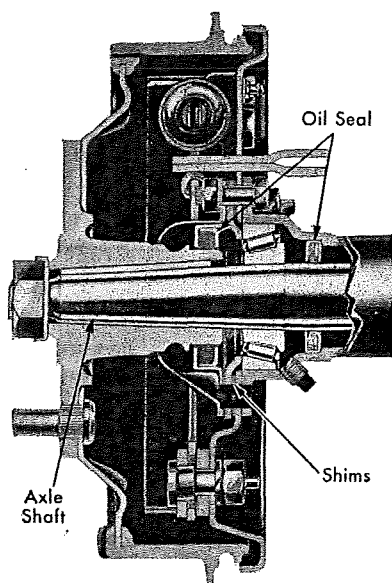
Group Nos. 200 and 201 Axle Shaft
